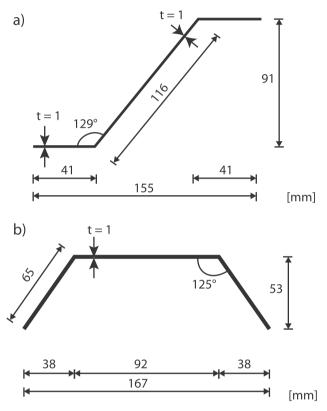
Dimensions of Z-section (a) and U-section (b).
